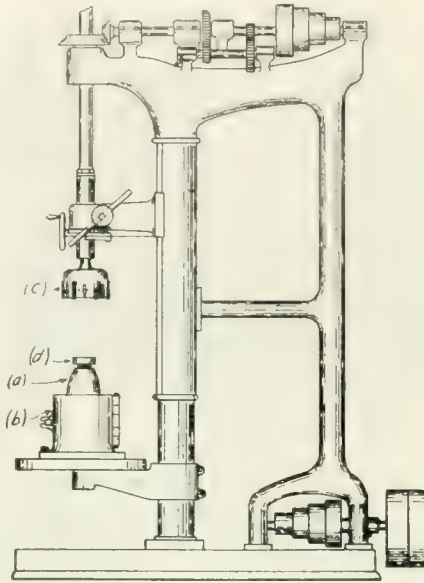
TIGHTENING SHELL SOCKETS ON A DRILL PRESS.
